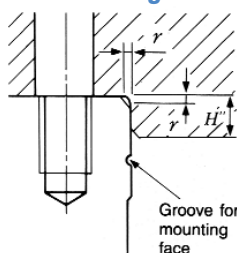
Ball Slide Datum Face Mounting Part
